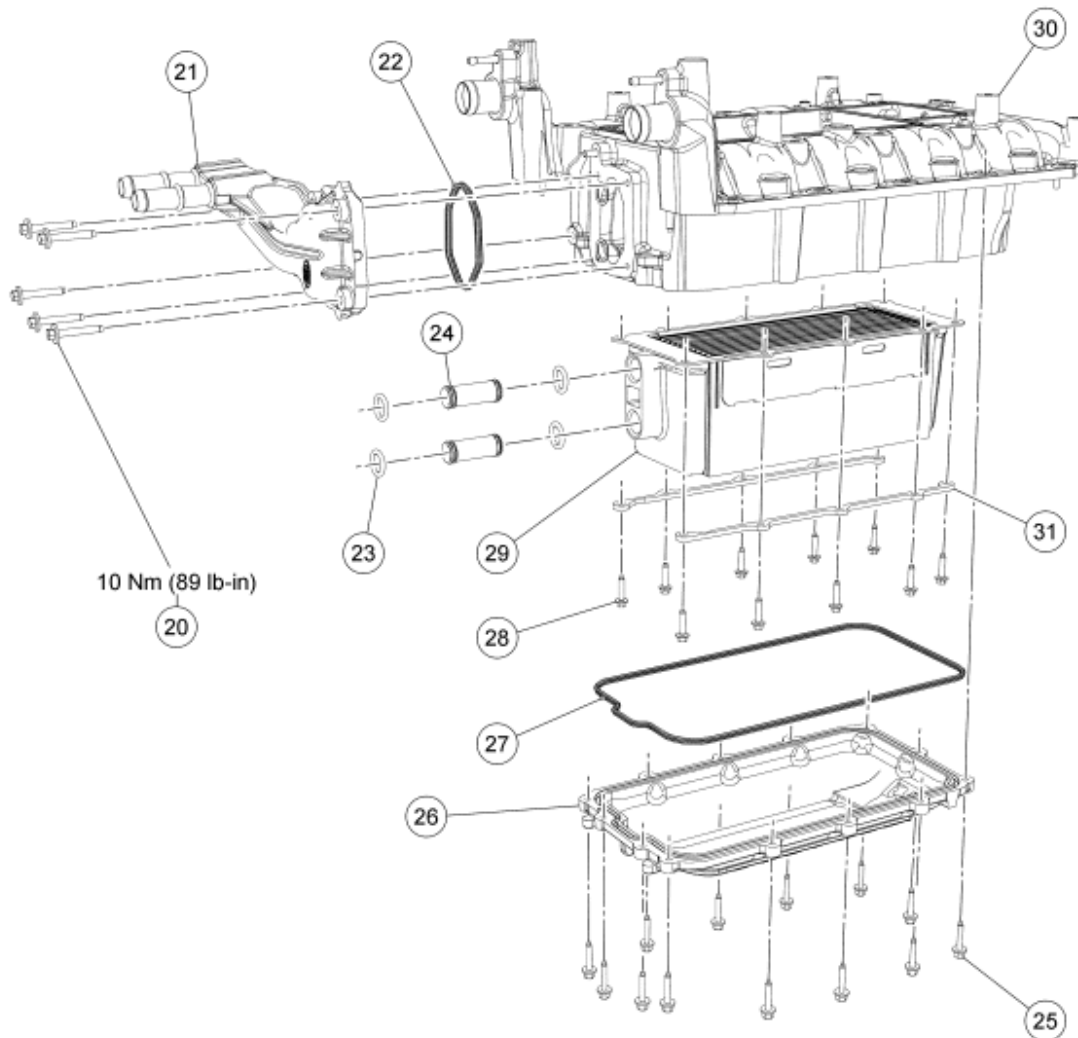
Exploded View Of Intake Manifold Assembly With Torque Specification (2 Of 3)
